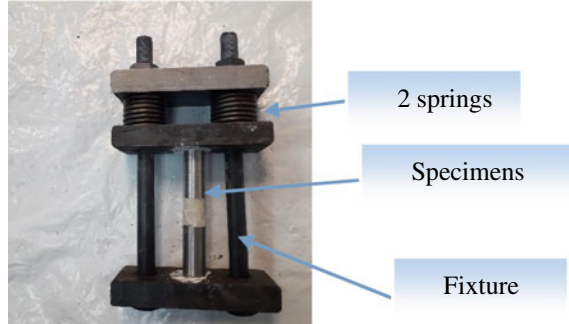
Hydraulic Press with specimens clamped in fixtures
